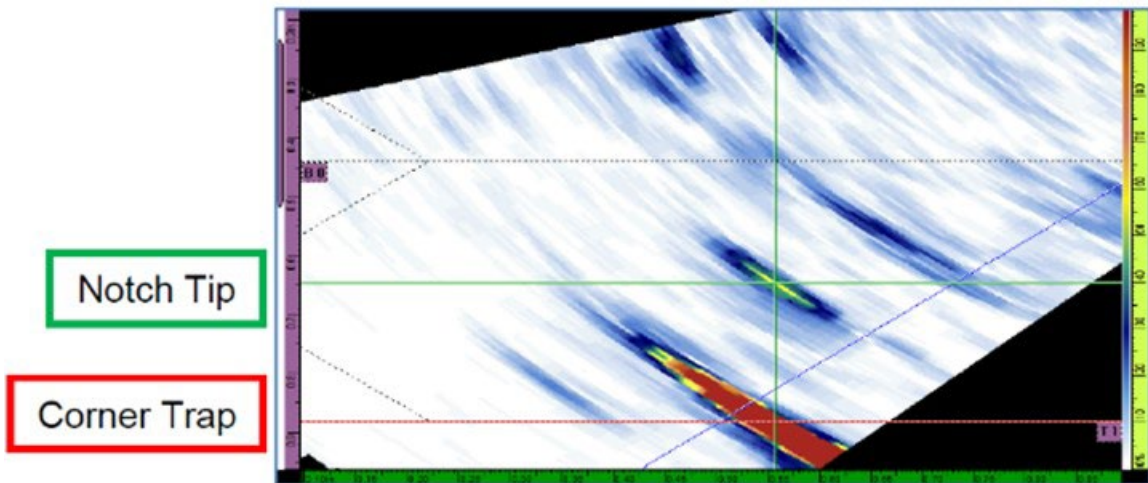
Height measurement of the Flaw D in TTCI-2 MG butt weld test panel
